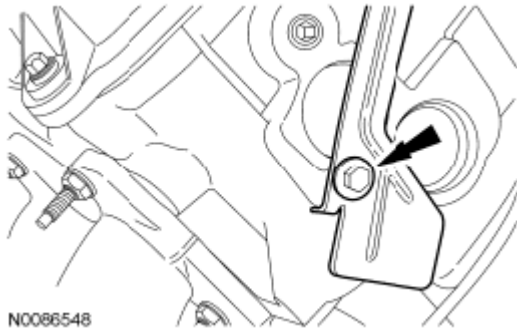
Locating Intake Manifold Vacuum Tube Support Bracket Bolt
